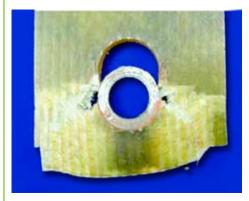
Typical failure for a composite/ steel lap shear specimen with a steel insert.
